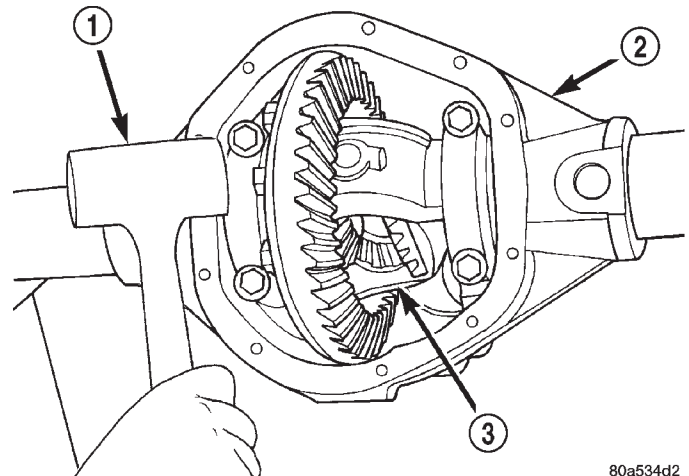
Seat Pinion Gear Side Differential Dummy Bearing
